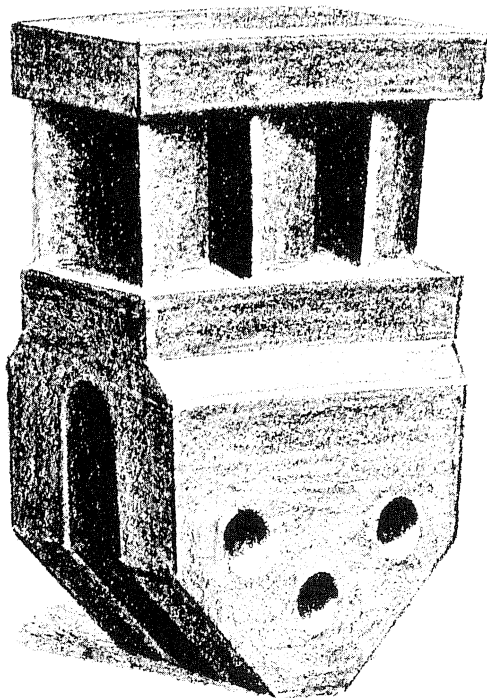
Three Blades Welded Together Form a First Stage Blade Package [1].
